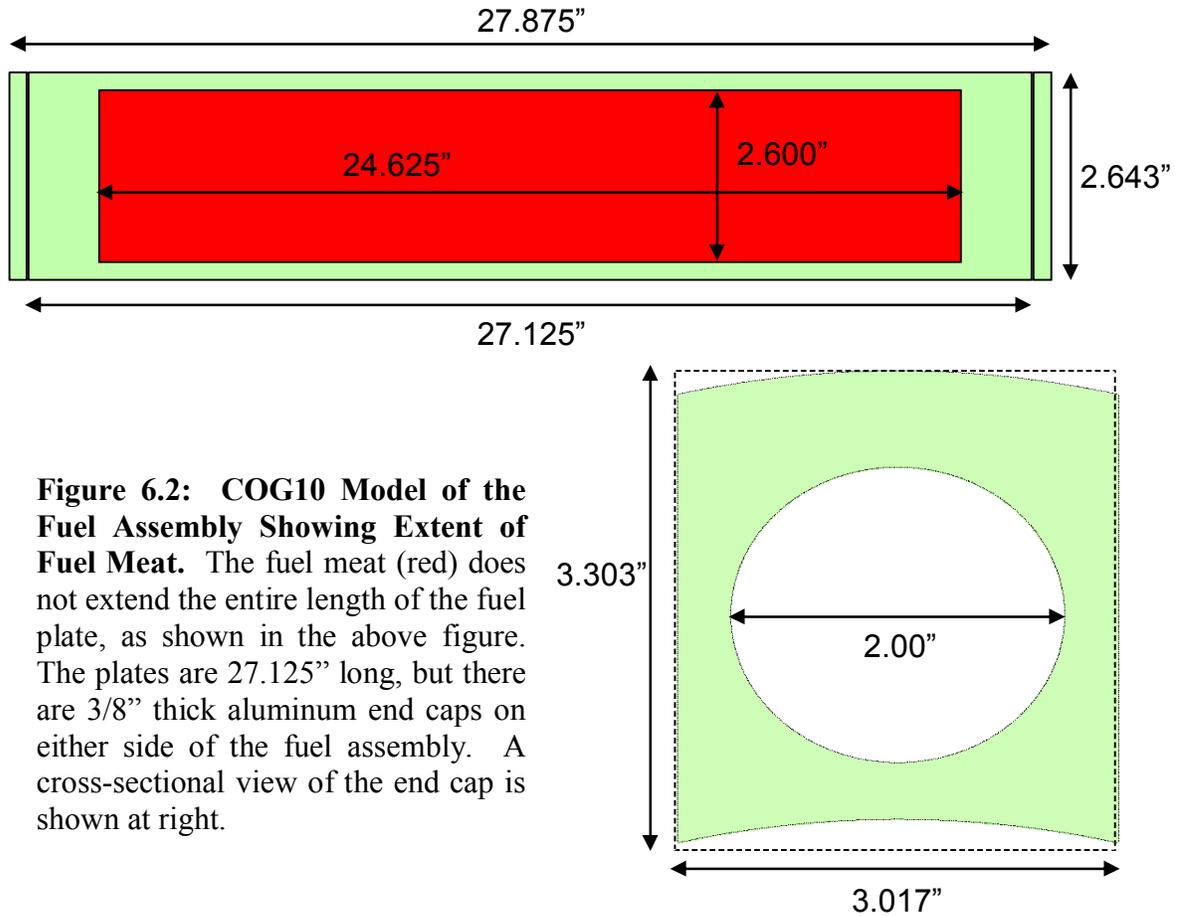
COG10 Model of the Fuel Assembly Showing Extent of Fuel Meat. The fuel meat (red) does not extend the entire length of the fuel plate, as shown in the above figure. The plates are 27.125" long, but there are 3/8" thick aluminum end caps on either side of the fuel assembly. A cross-sectional view of the end cap is shown at right.
